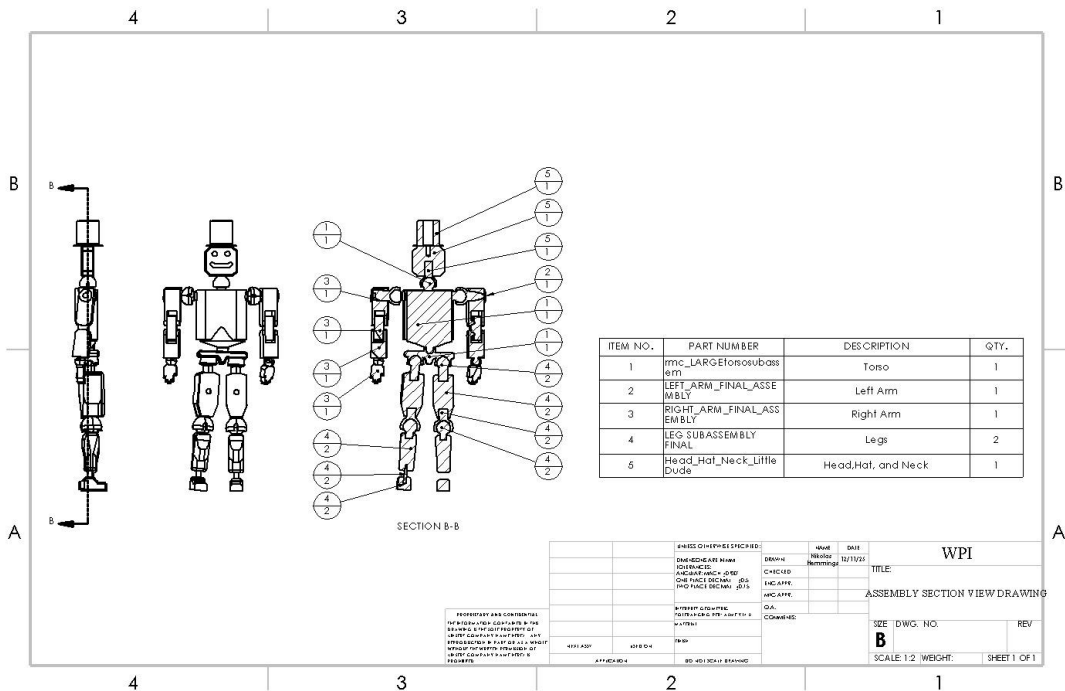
Little Man Jr. Sectioned View Assembly Drawing
